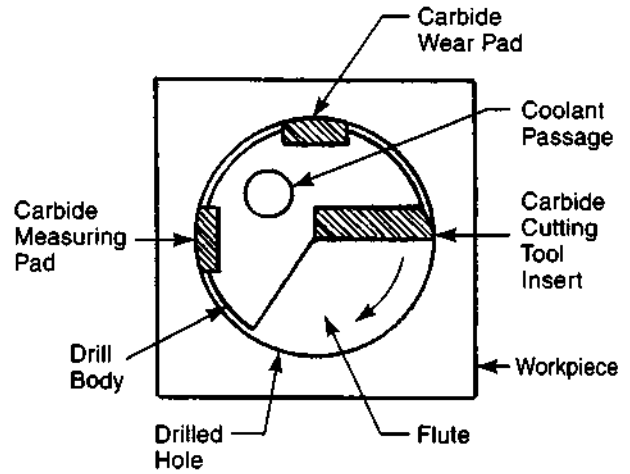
B6 A typical gun drill, viewed from the cutting end.
